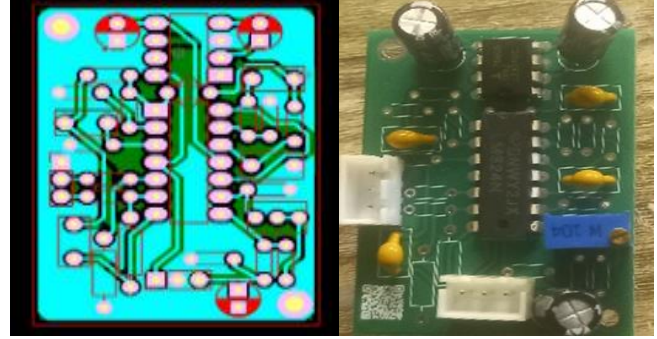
Custom-built active surface EMG sensor PCB layout.
